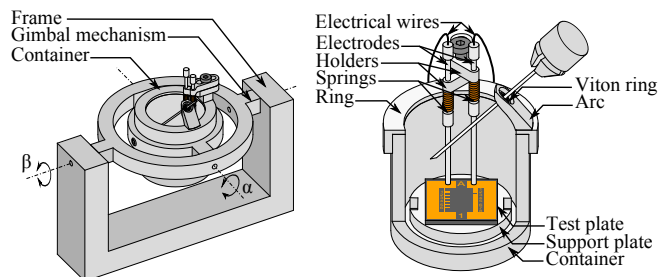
Design of the test plate holder. The test plate is fixed on top of a support plate and placed inside a cylindrical container. The container is supported by a gimbal mechanism which enables it to rotate in two DOFs. Rigid electrodes are used to connect the test plate with the electrical wires of the acquisition system.
